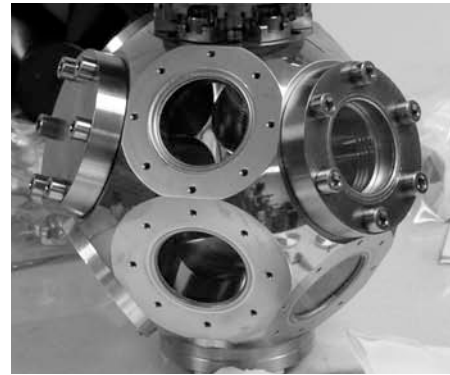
Picture of a titanium vacuum chamber with several high temperature weld-in windows. Three of the visible windows are welded directly into the chamber, with a fourth welded into a titanium ConFlat flange.
